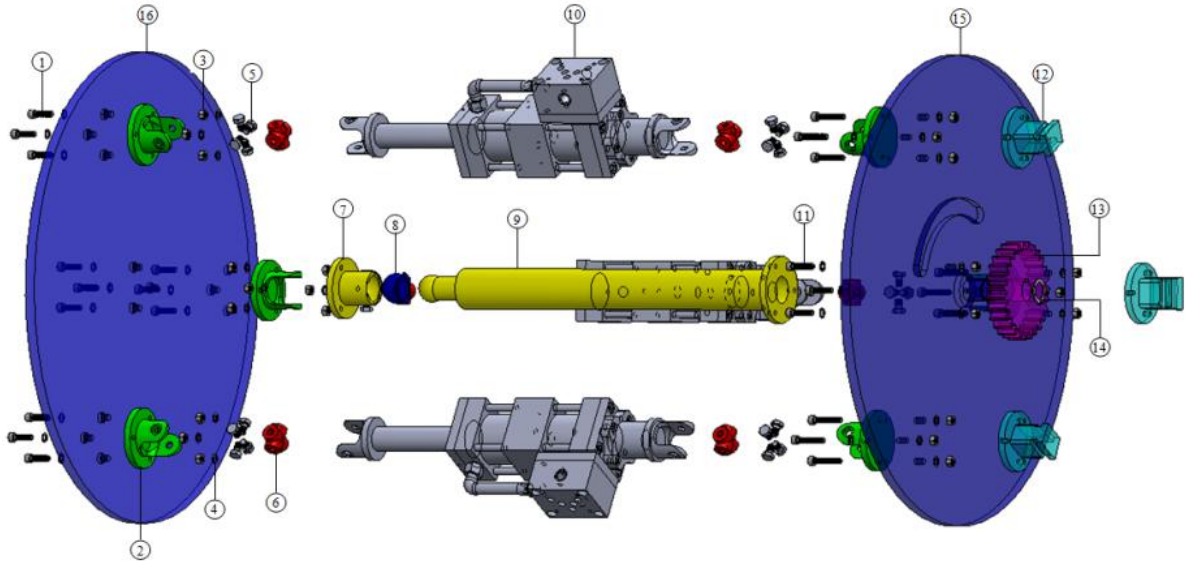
3D-CAD Model of the parallel manipulators mechanisms.
